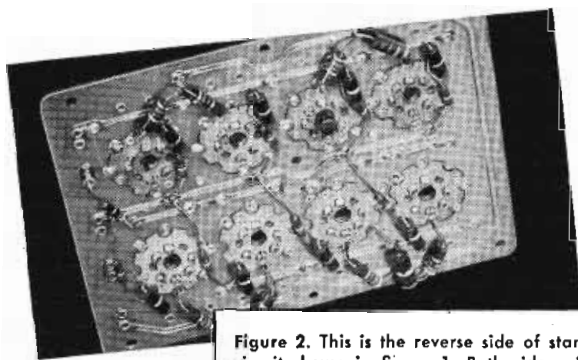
This is the reverse side of stamped circuit shown in figure 1. Both sides of the circuit were stamped in one operation.
